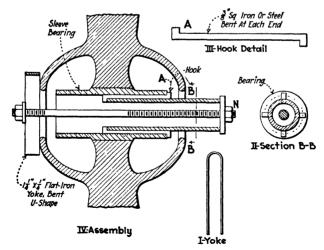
Method of removing a sleeve bearing from a bearing housing. (Industrial Engineer, Sept., 1924.)
